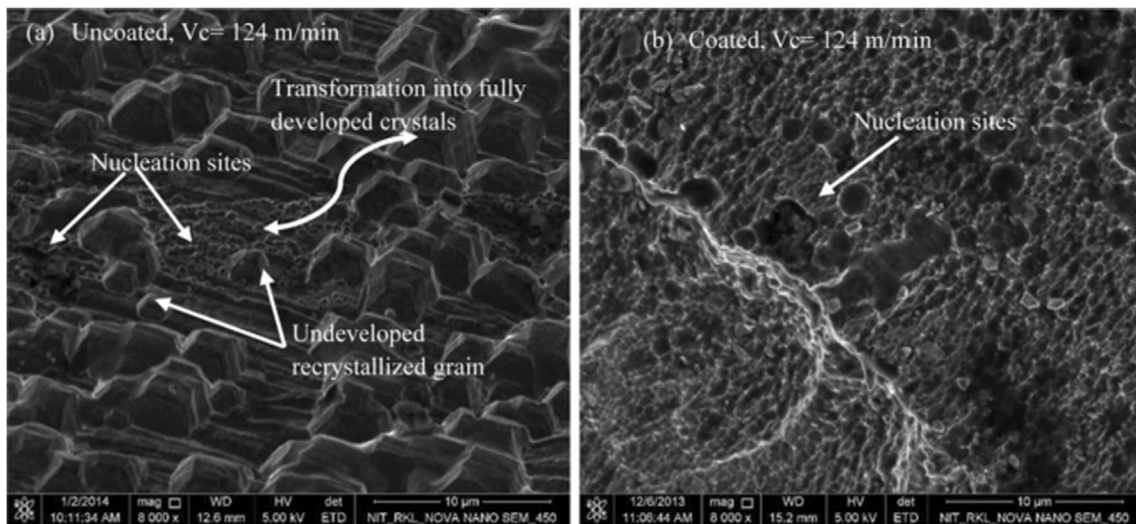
SEM images of micro-morphology of machined surface for Inconel 825 formed with (a) uncoated insert and (b) coated insert at $V_c = 124$ m/min, $f = 0.198$ mm/rev, $a_p = 1$ mm [136]
